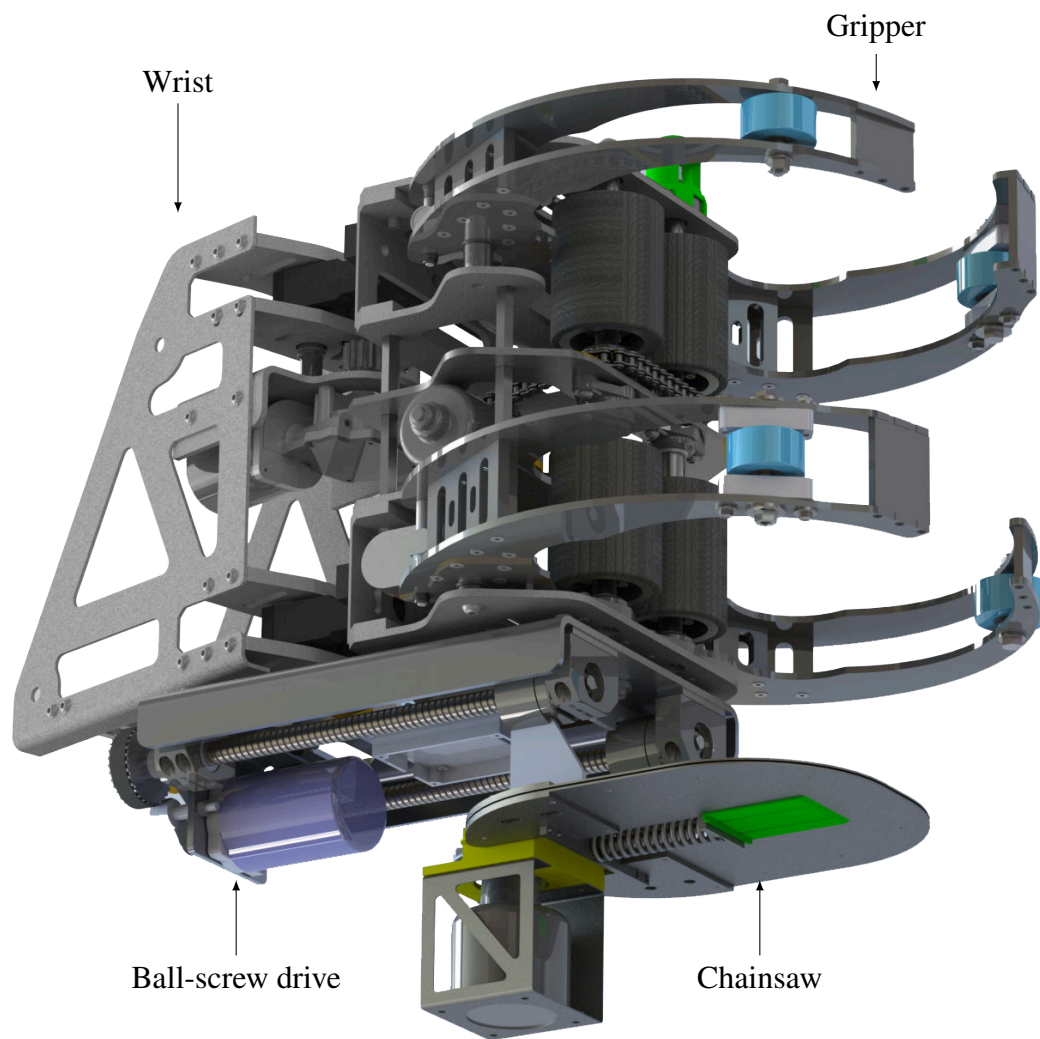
Chainsaw mechanism mounted to the gripper
